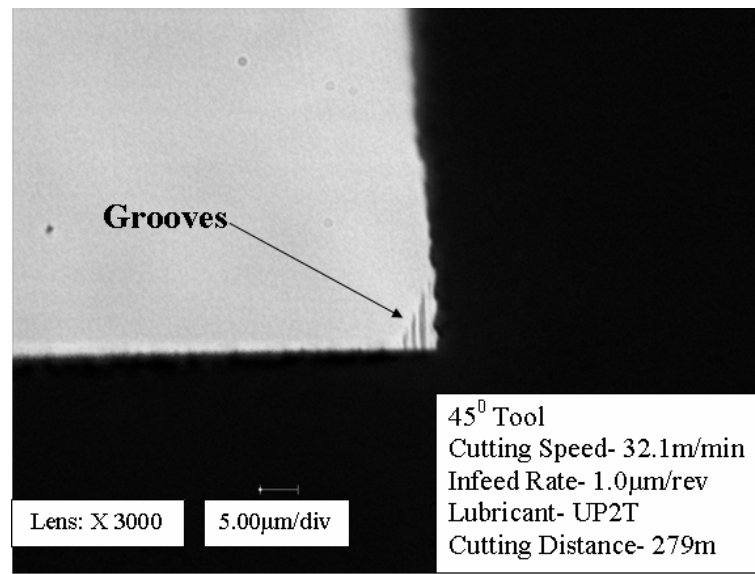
Keyence image of grooves on left flank face of a 45° tool (tool-3), after 279m cutting distance
